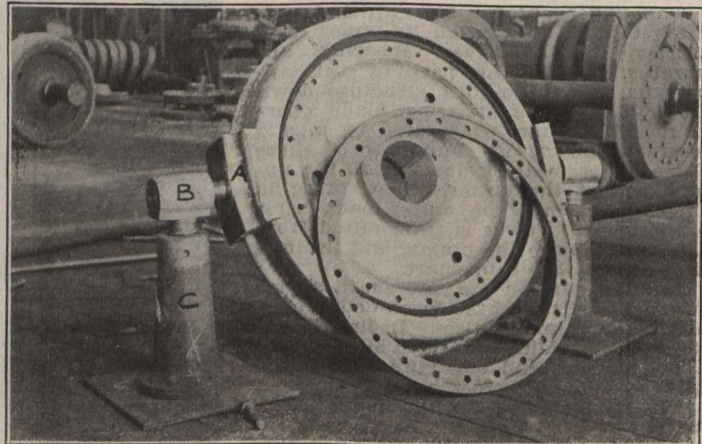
Jig for Holding Tires while Bolting in Retaining Ring.
